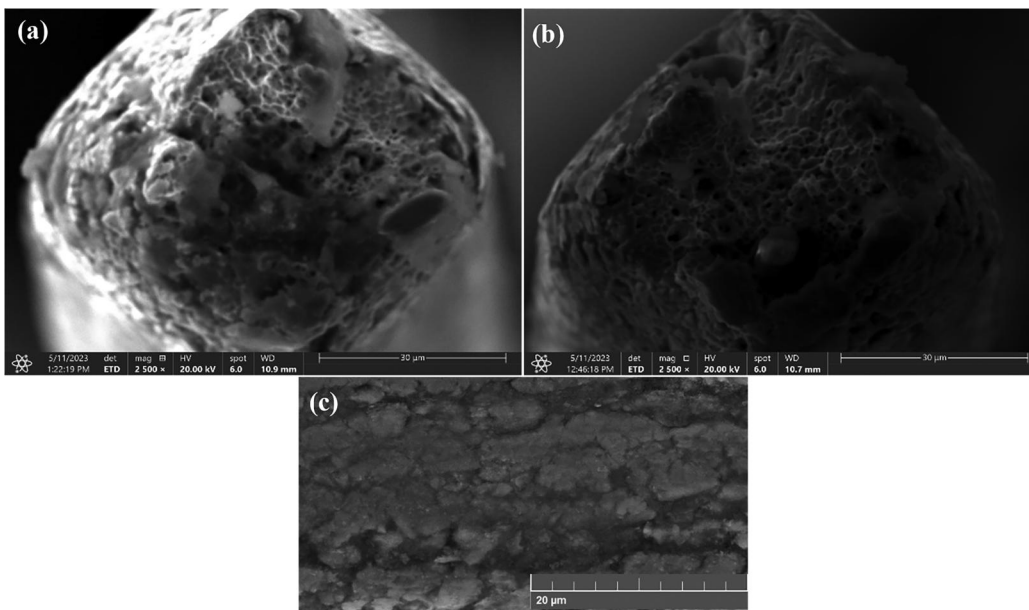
(a,b) 60 μm NiTi Wire fracture surfaces, (c) general view of the 60 μm NiTi wire side.
